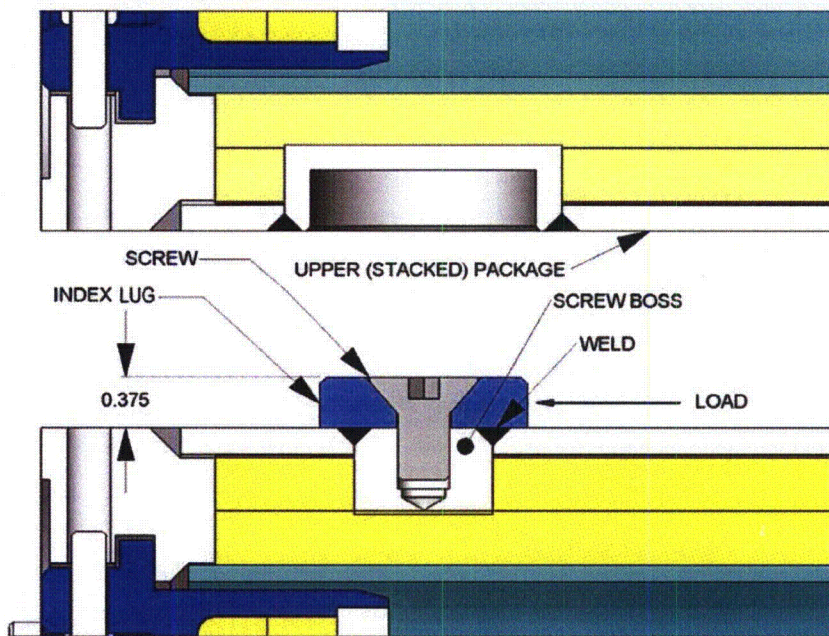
Index Lug and Mating Pocket of Stacked Packages
